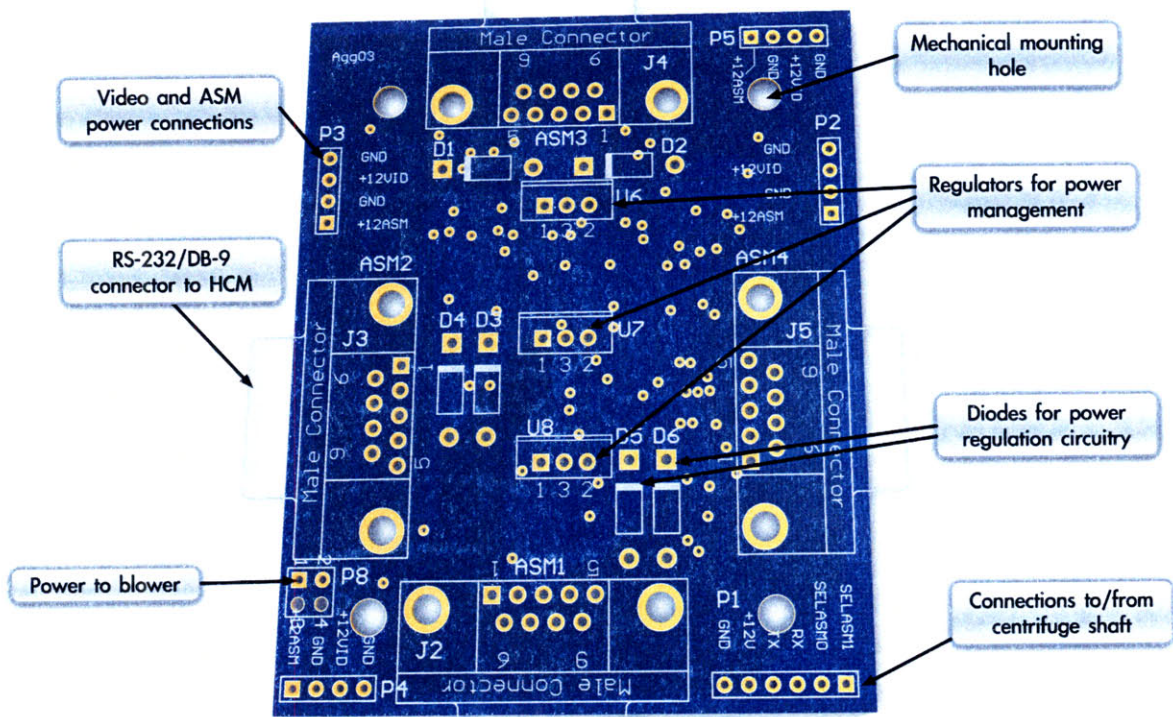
CAD rendering of the Multiplexing Aggregator board (front)
